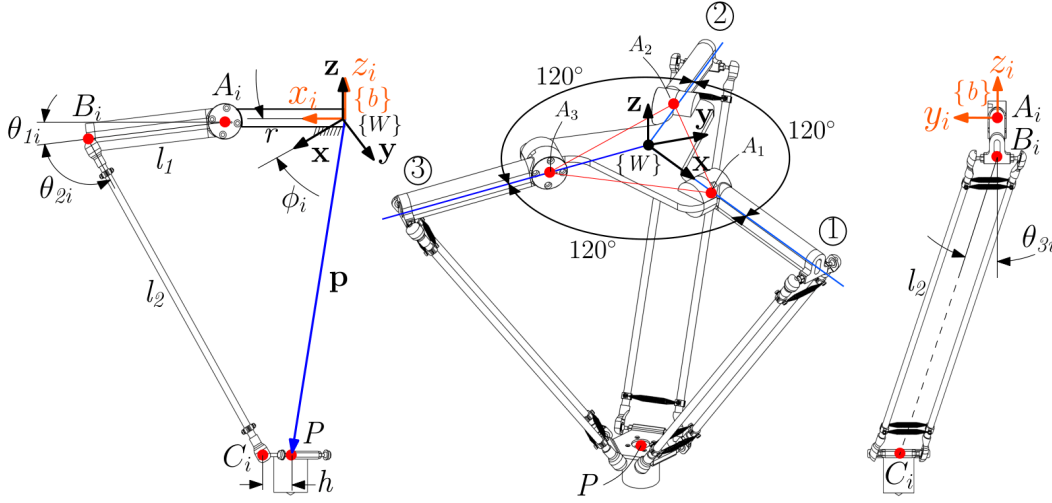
Geometric parameters of the 3-RRR Delta robot.
